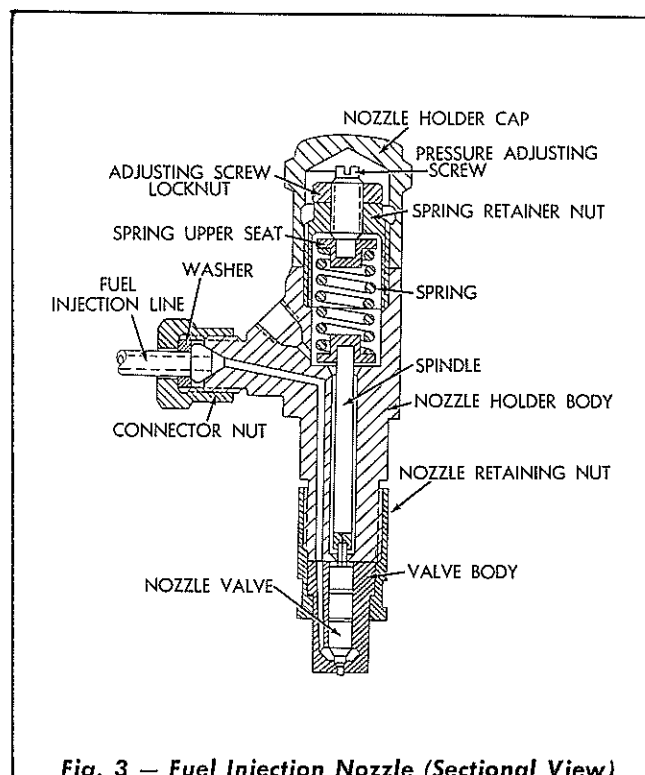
Fuel Injection Nozzle (Sectional View)
